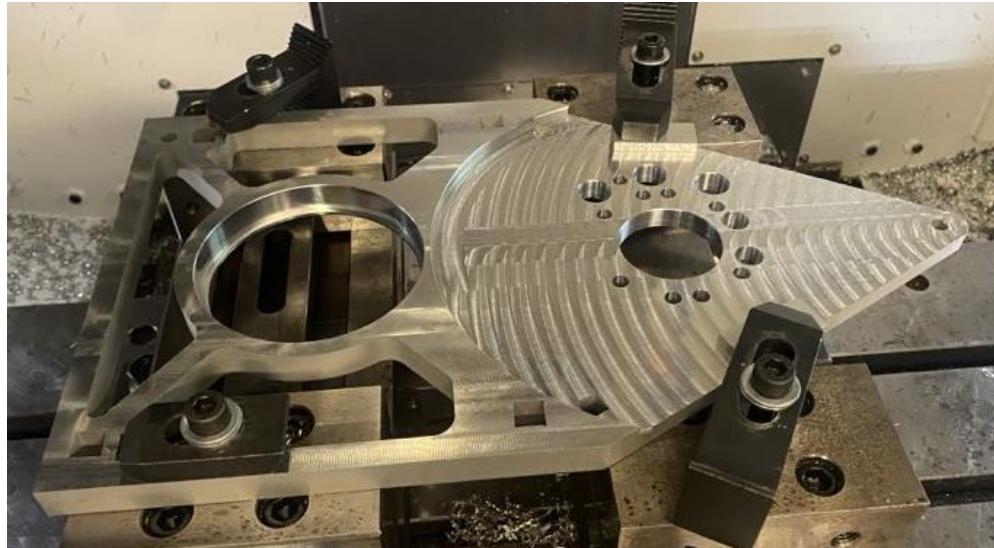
Drivetrain V2 Motor Plate in the CNC Mill
